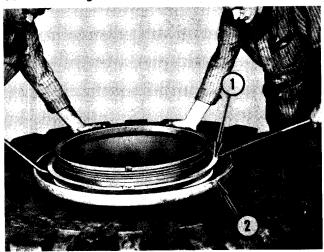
REMOVING BEAD SEAT BAND 1. Bead Seat Band 2. Flange
